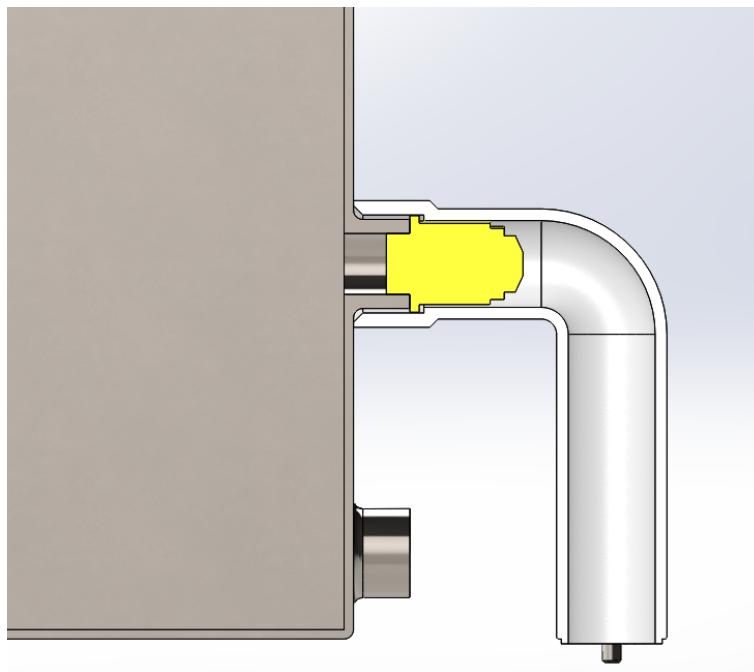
Inspiratory Flow - Pressure Relief. Pressure Relief Valve shown in yellow.
